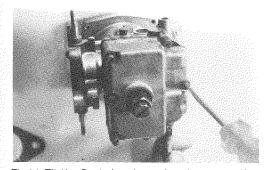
Fit the float chamber using six screws, the three long ones in the deep holes and the three short ones in the less deep holes. Again, take care not to strip the threads in the soft alloy casting.
